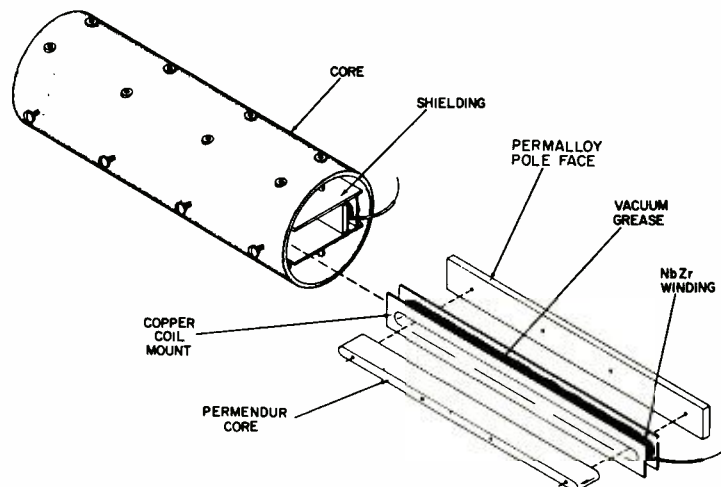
Exploded view of superconducting magnet and coil assembly.
